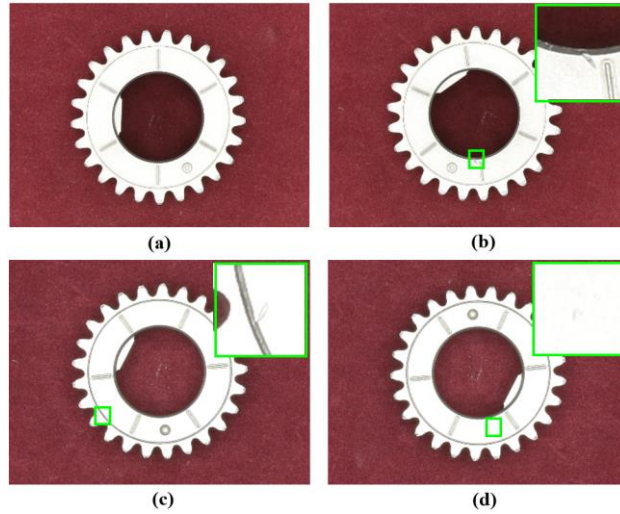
Mechanical parts. (a) A normal part. (b-d) Parts with tiny surface defects. From the view of engineers, the scratch with over 0.5mm depth is considered as a defect.
